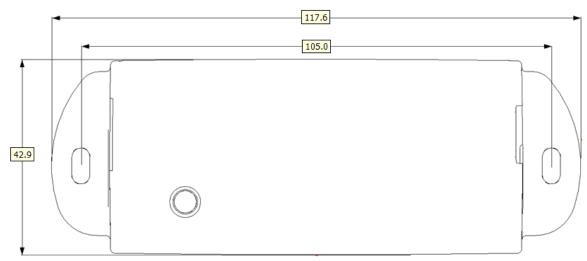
LDSBUS Thermocouple Sensor Adapter Dimension – Top View
